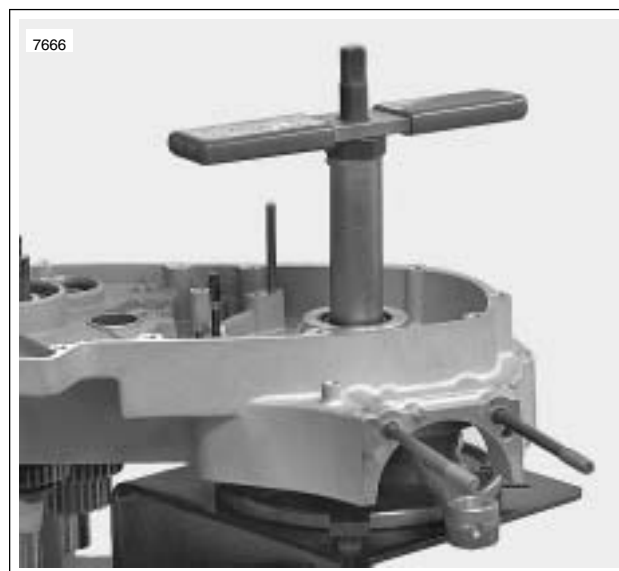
Installing Flywheel Spacer and Outer Bearing
